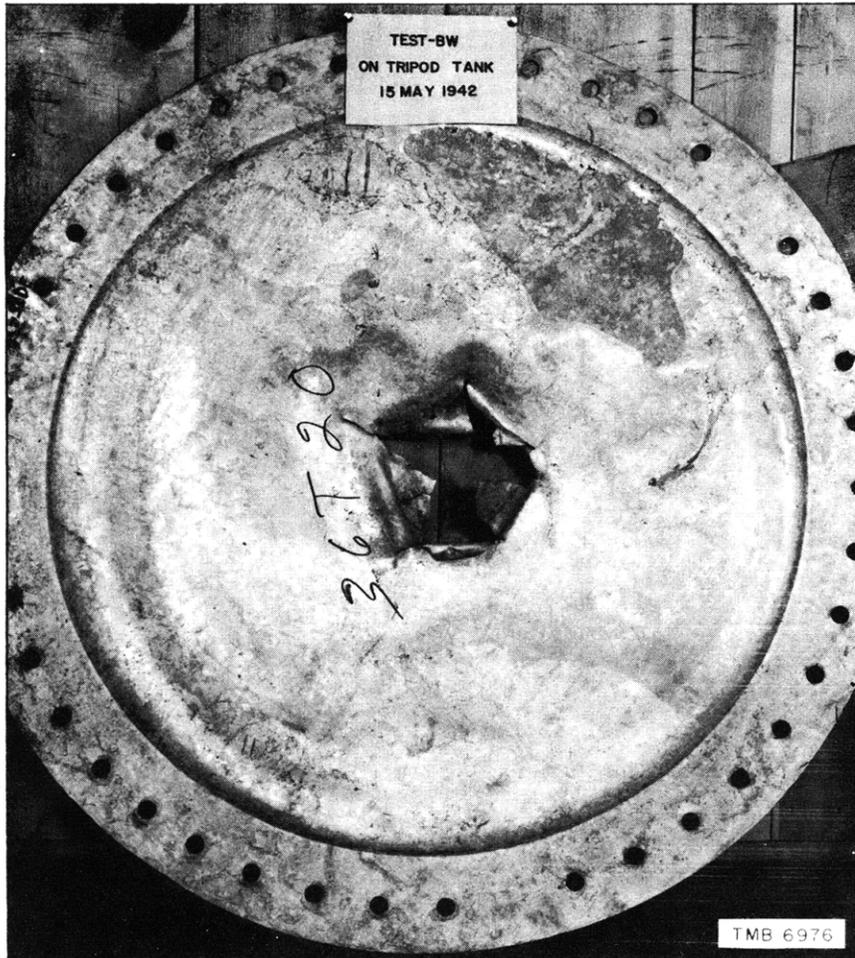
Facing Diaphragm of Wood-Filled Assembly after Explosion
